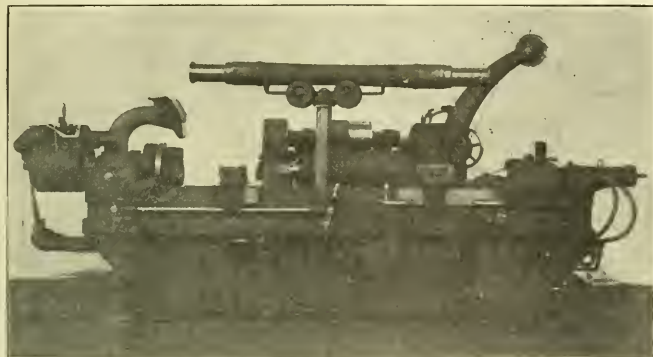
GRINDING MACHINE WITH AXLE RAISED.
